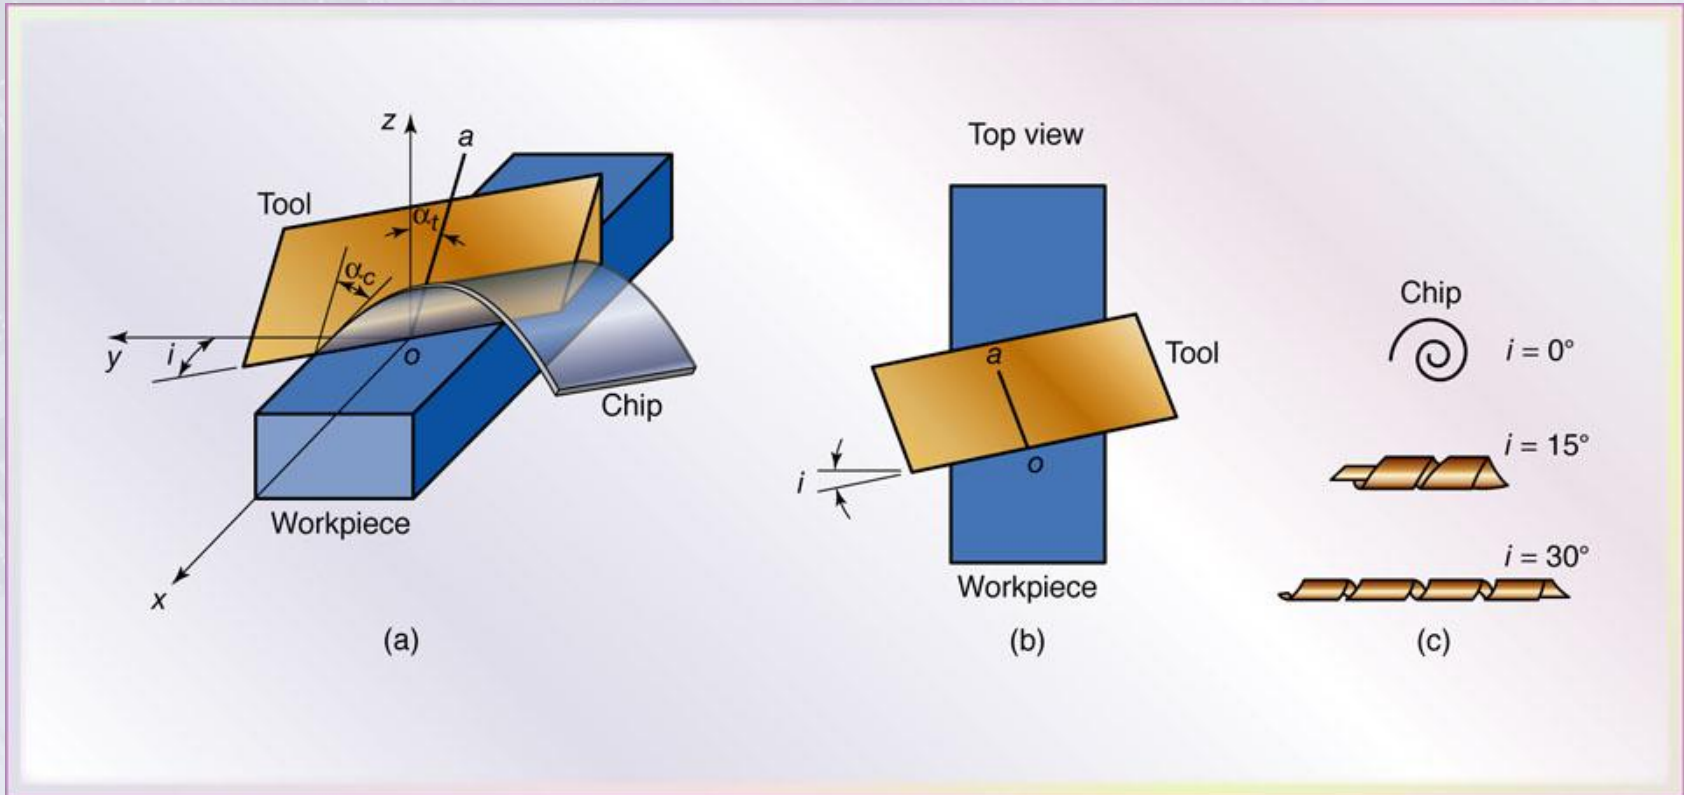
(a) Schematic illustration of cutting with an oblique tool. Note the direction of chip movement. (b) Top view, showing the inclination angle, i . (c) Types of chips produced with tools at increasing inclination angles.
